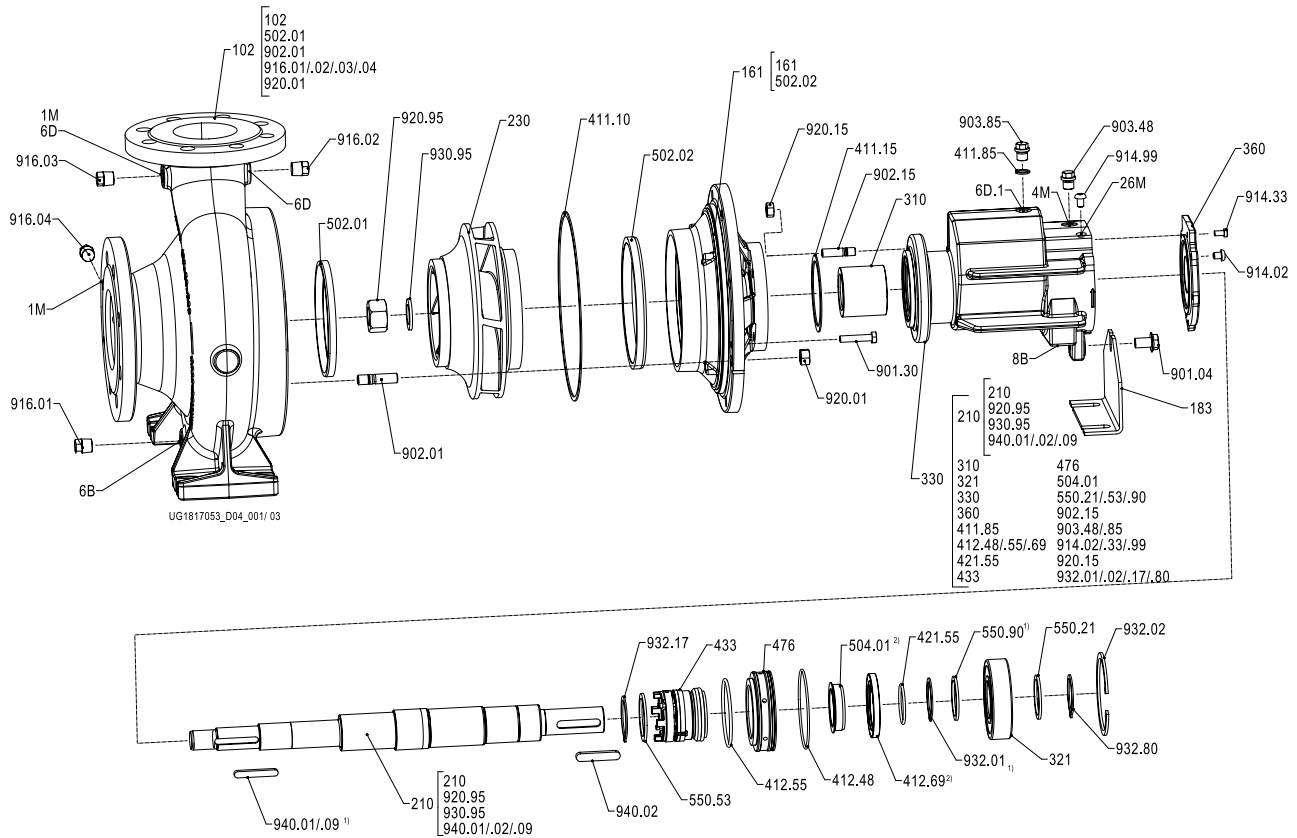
Exploded view of Etanorm SYT; bearing bracket WS_35_LS / WS_55_LS (special design)
